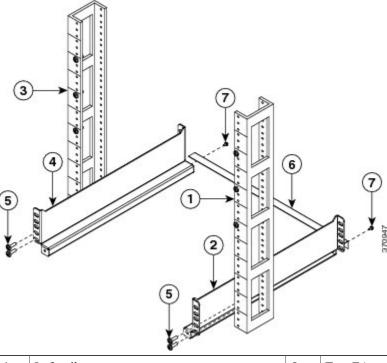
Installing Shelf and Crossbar Brackets in a 17.75-inch Opening
